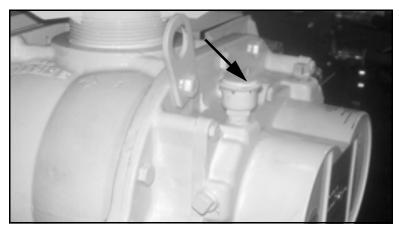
Remove the oil fill cap on the top of the blower housing.
